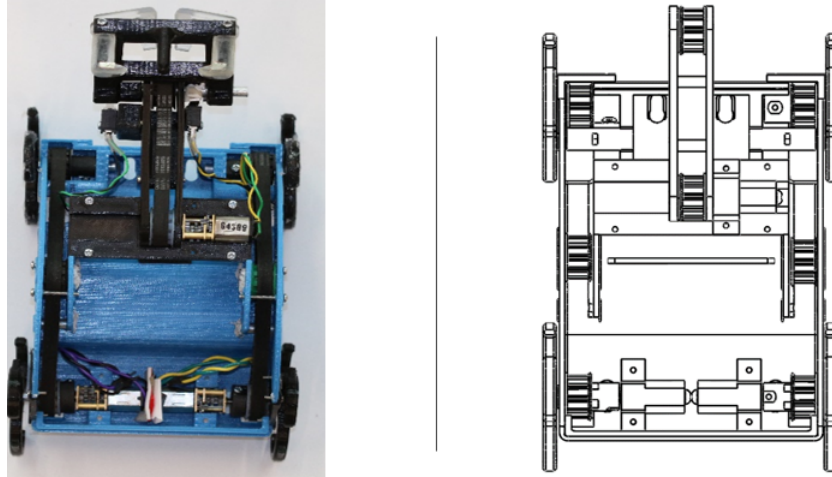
The left part of this figure shows the new drive train and 3D printing body of the robot. The right part illustrates where those pulleys and motors are positioned.
